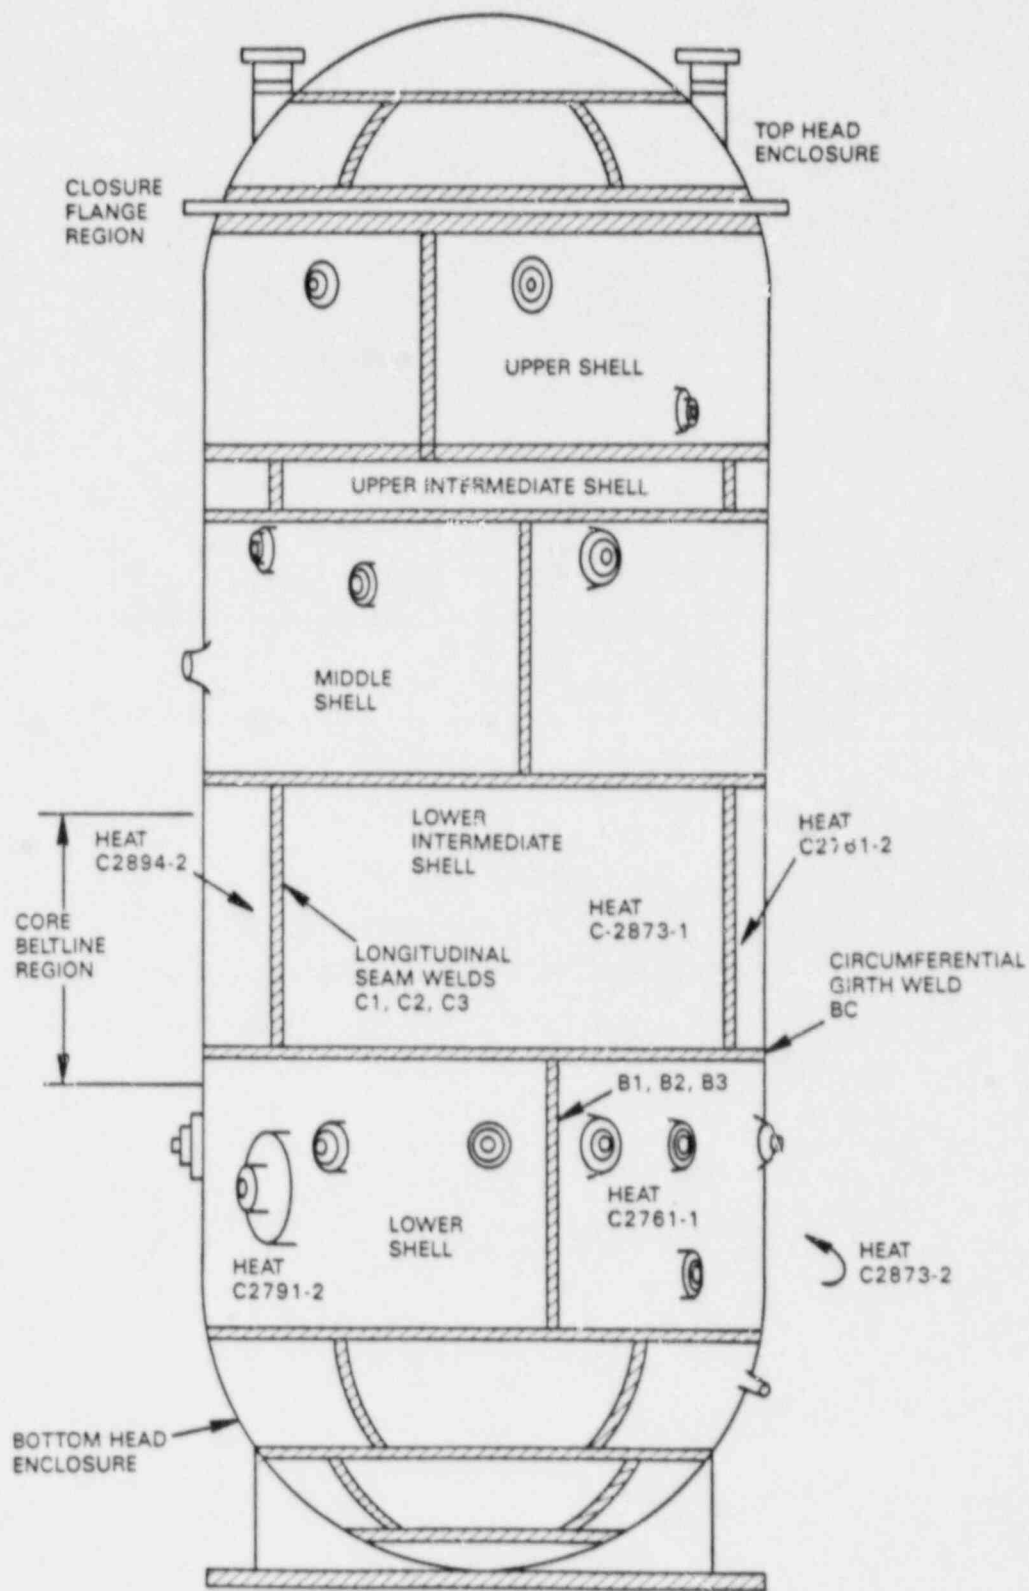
Schematic of the RPV Showing Arrangement of Vessel Plates and Welds
